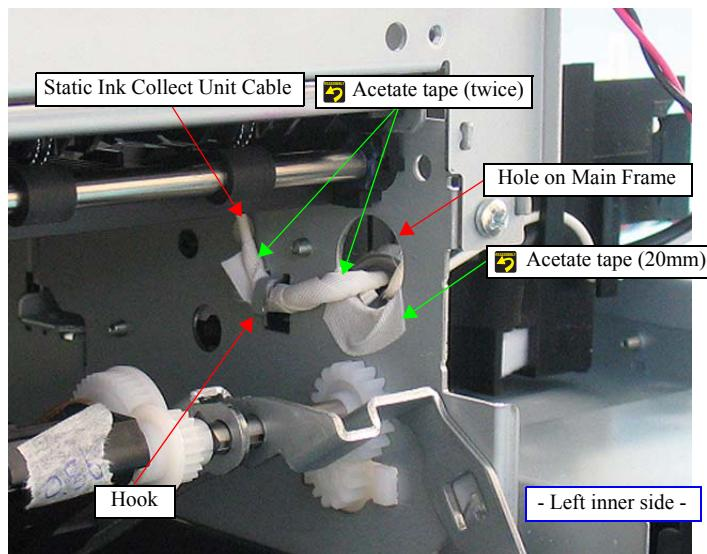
Removing the Front Paper Guide & EJ Roller Assy (1)
